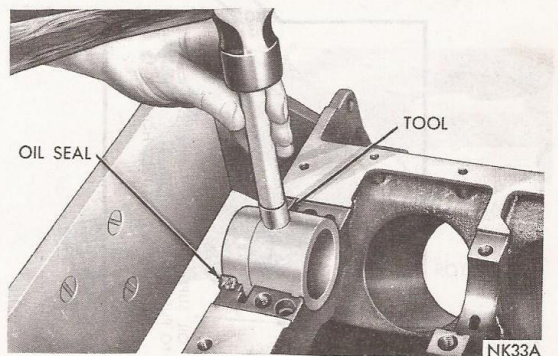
Trimming Rear Main Upper Oil Seal
